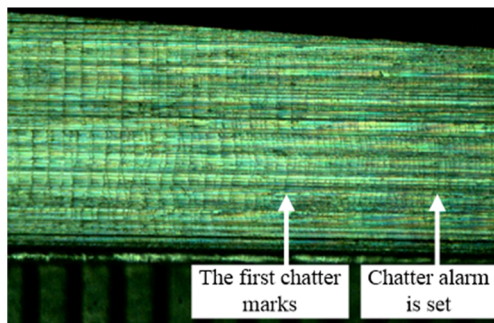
The enlarged surface of workpiece machined in the first experiment
